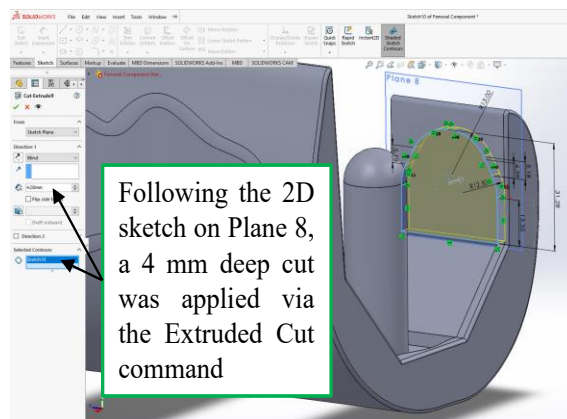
Creation of a 2D sketch on Plane 8, which was defined on the selected surface of the Femoral Component, followed by cutting using the Extruded Cut command
